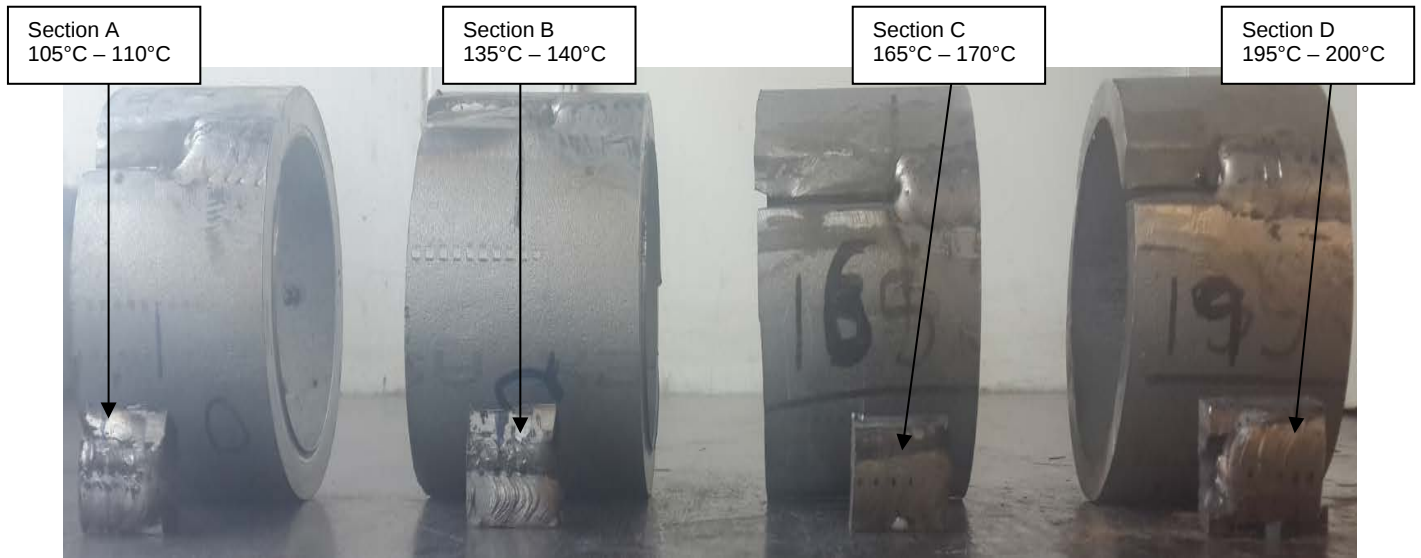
Welded pipe samples with sections that were cut out for mounting and sample preparation
